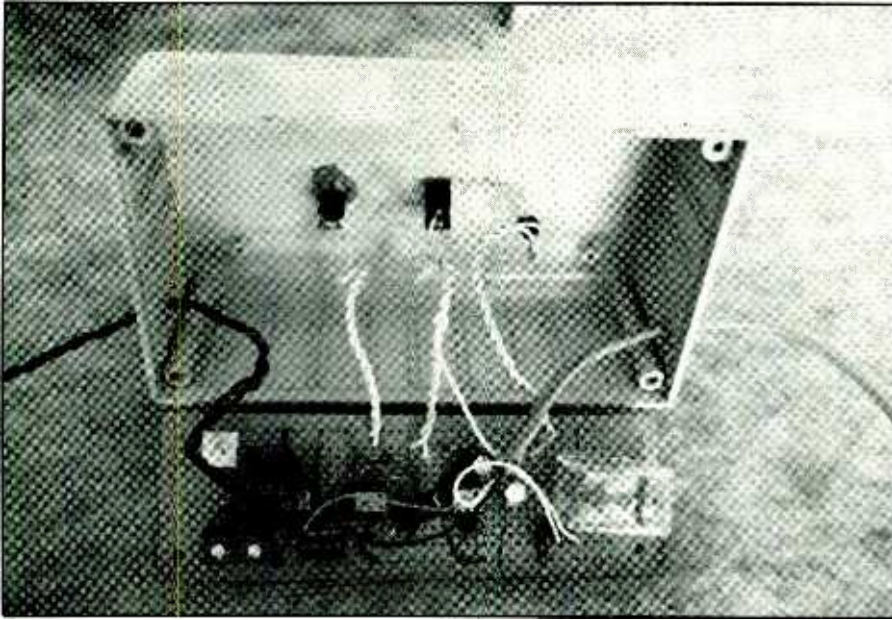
Interior view of author's prototype built on prototyping board. This version requires a separate dual-polarity bench-type dc power supply.
